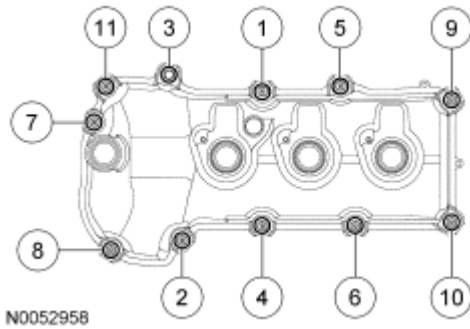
Installing RH Valve Cover Stud Bolts In Sequence
